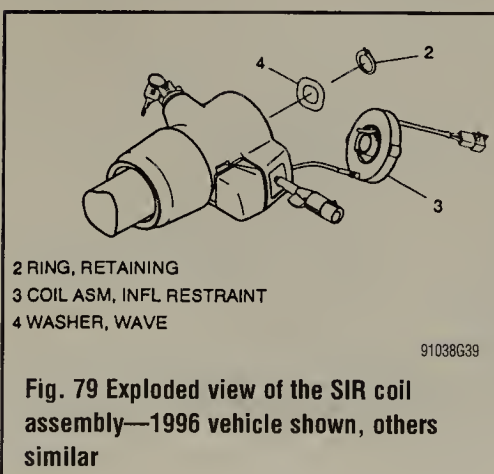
Exploded view of the SIR coil assembly—1996 vehicle shown, others similar
